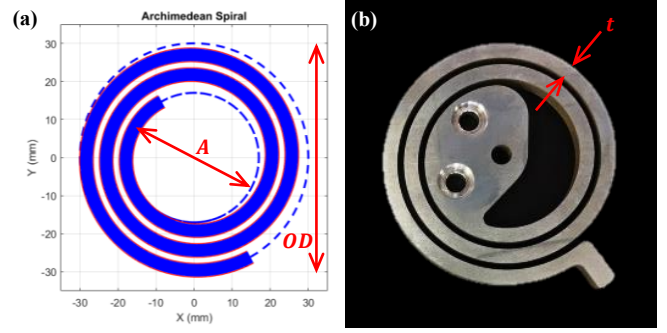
Geometry design of the spring arm based on the Archimedean spiral. (a) Planar spiral spring by EDM for the CAKE-2 prototype (b)
